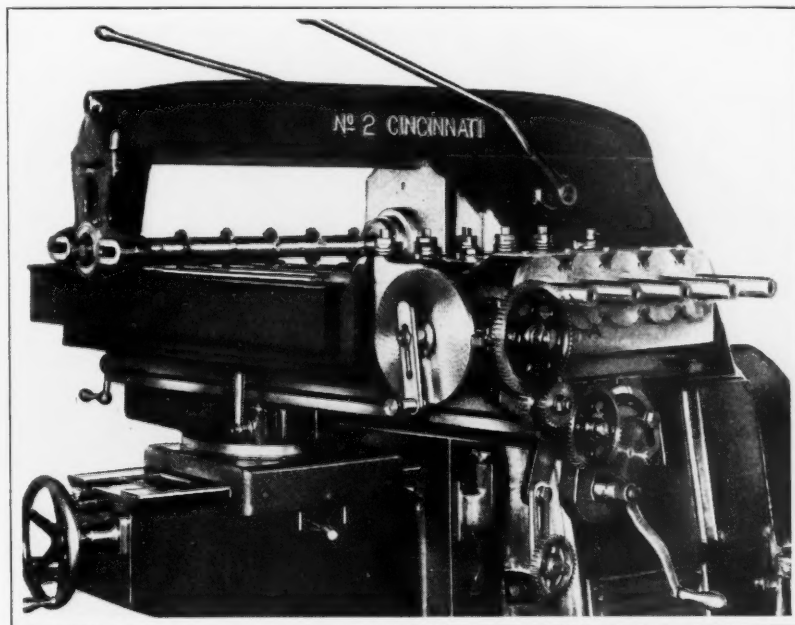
Knee and Column Type Machine Equipped for Milling Spiral Flutes in Five Pieces Simultaneously, Using a Universal Fixture
